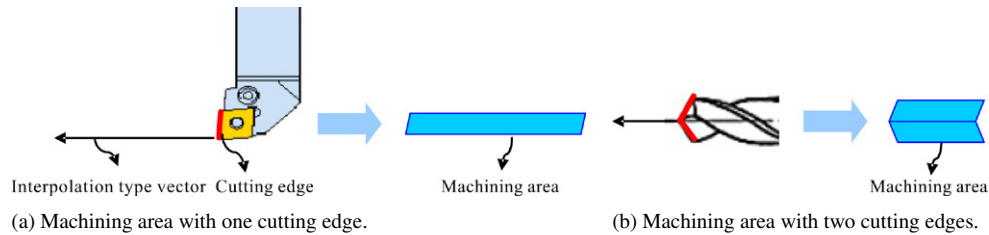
Cutting edge passed machining area by interpolation type vector.
